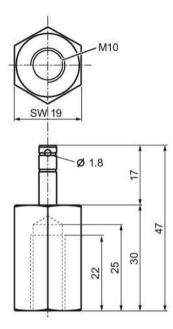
Dimension drawing of quick change holder 6GT2690-0AH10
